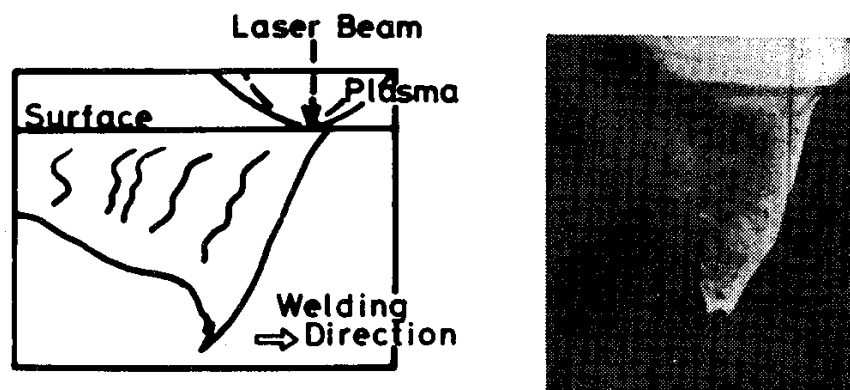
Side view of keyhole laser welding of soda-lime glass, with a 15 kW CO₂ laser [Arata et al, 1985].
